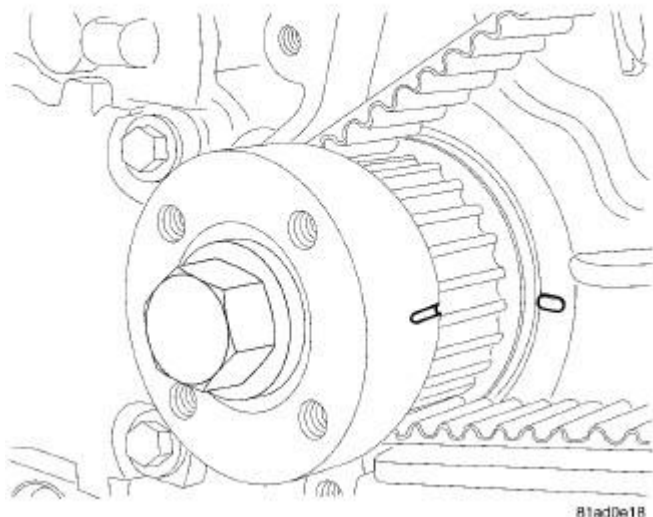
Crankshaft Timing Belt Drive Sprocket & Timing Belt Cover Aligned
